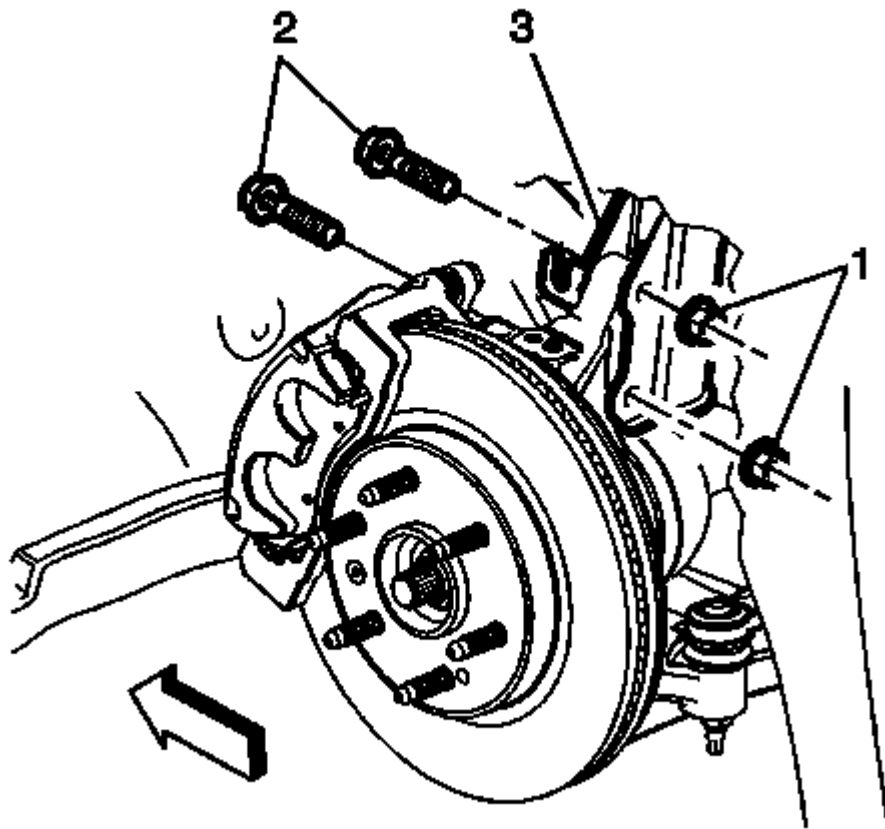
Strut Assembly, Steering Knuckle & Nuts
